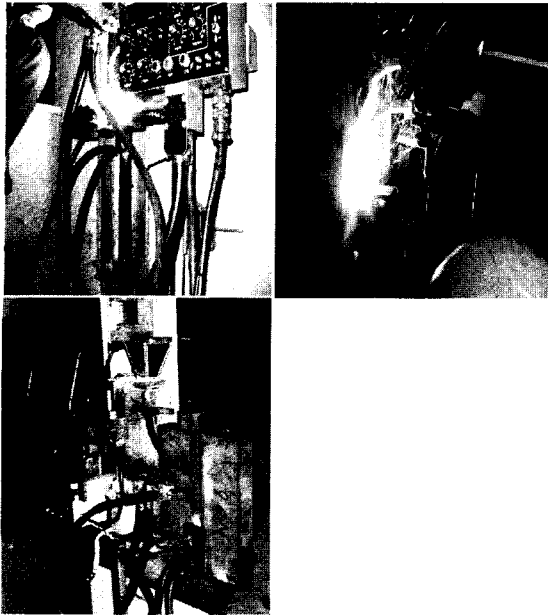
Consumable guid tube type welding head of ESW
